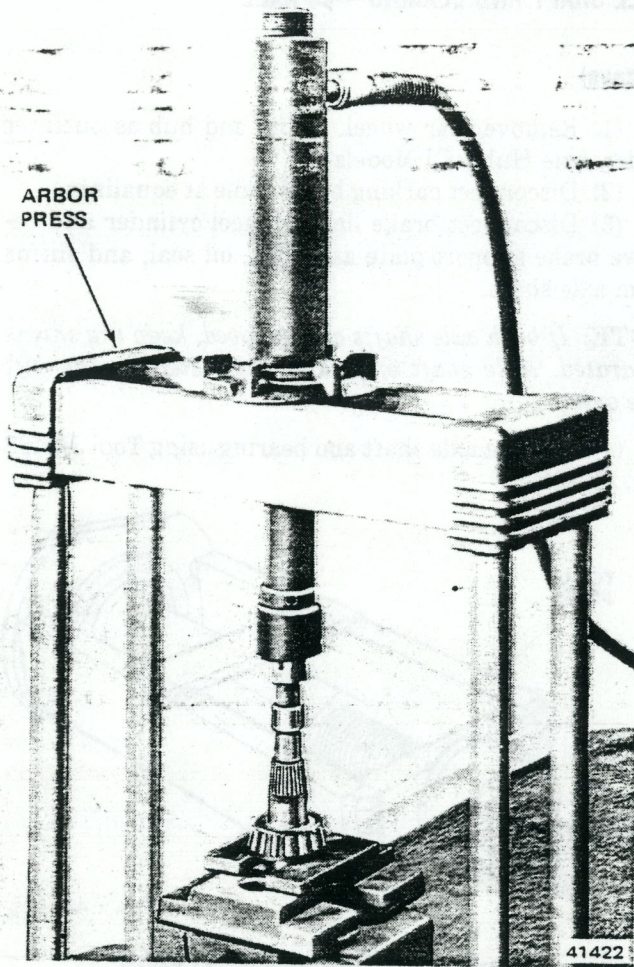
F-21 Axle Shaft Bearing Removal—CJ Models
